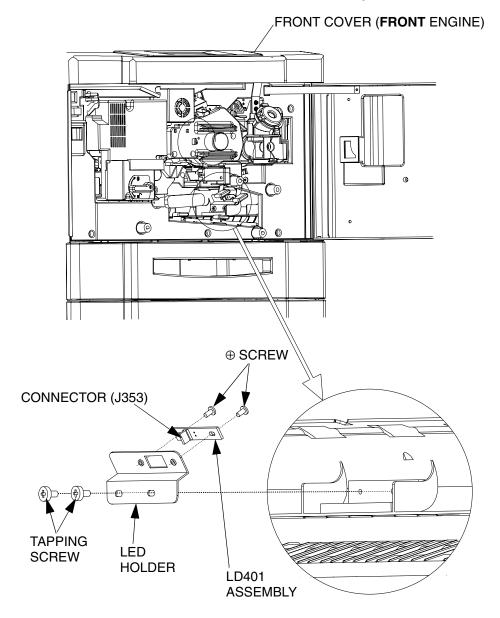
Removal of the Multi Feed Sensor (LD401 Assembly)
